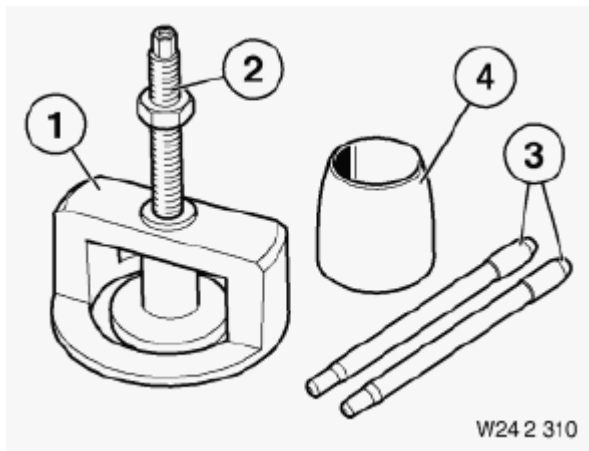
Tool Kit For Removing And Installing Reverse Gear Piston (24 2 310)
